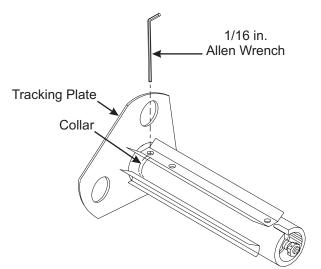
Adjust the Rewind Spindle Assembly Position
